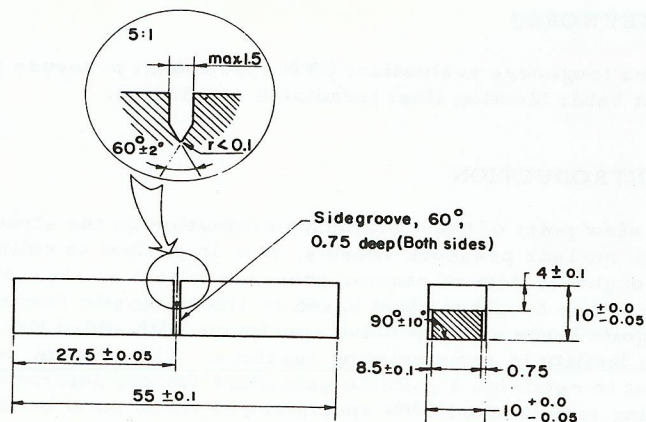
Fatigue pre-cracked CVN specimen of minimum 1.5 mm precrack.
